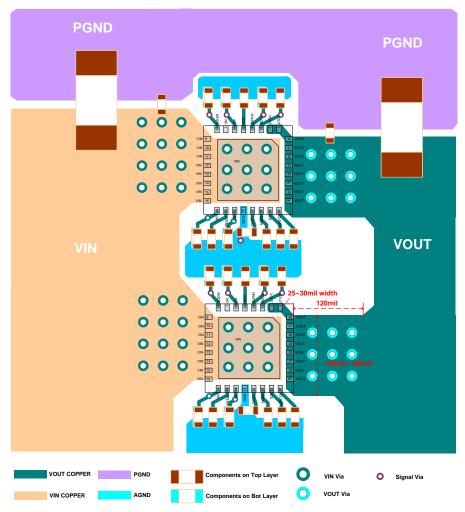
Example of PCB Layout for MP5981GLU (Placement & Top Layer PCB)
